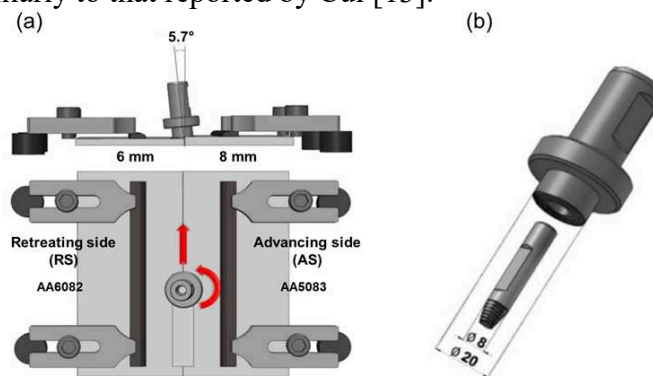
Welding approach (a) and tool geometry (b). The FSW tool consists of a threaded conical pin, with three flats and a spiral (scroll) shoulder with a diameter of 20mm.
